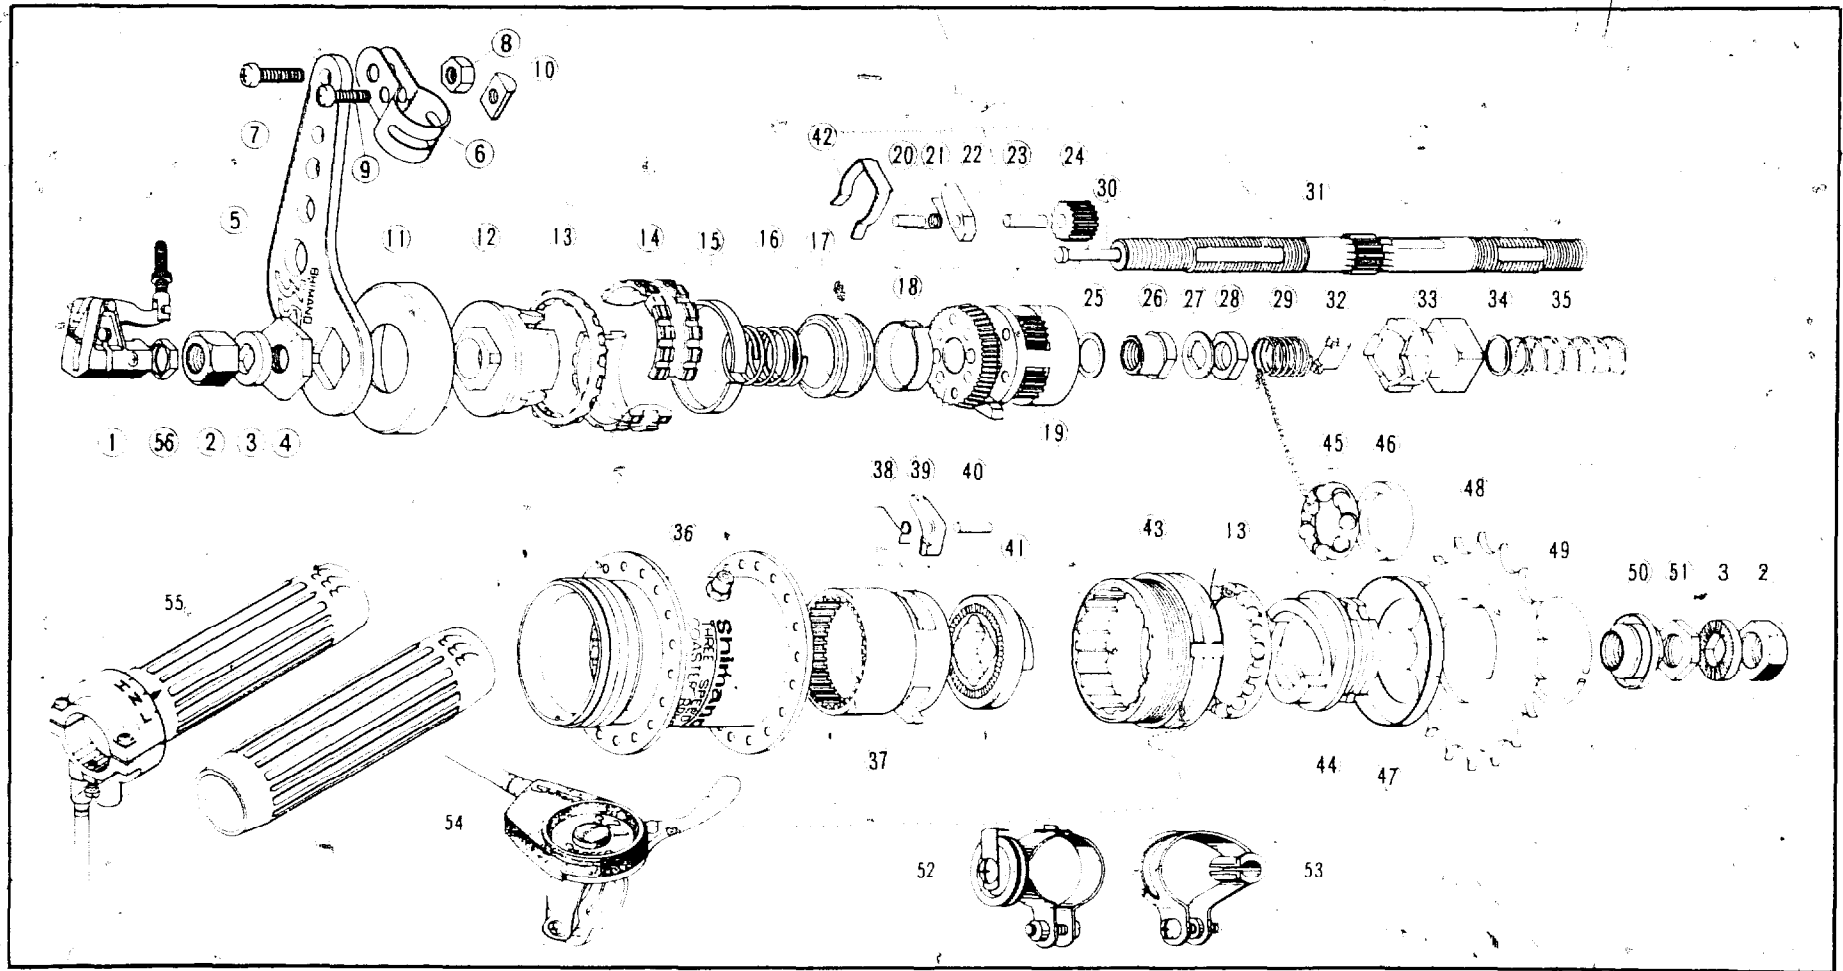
Exploded view of Shimano three-speed hub with coaster brake.
